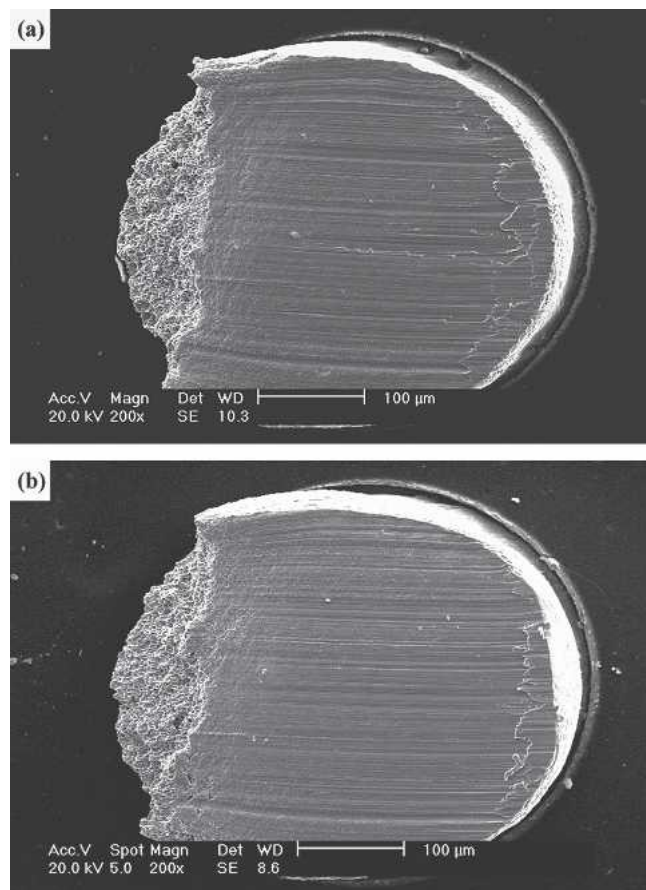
Typical Fractography of the (a) Sn3Ag0.5Cu and (b) Sn3Ag0.5Cu0.06Ni0.01Ge solder joints in BGA packages after ball shear tests.
